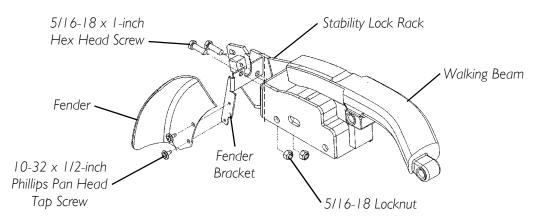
REMOVING/INSTALLING THE FENDER ASSEMBLY FROM A 2-POLE AND 4-POLE MOTOR
